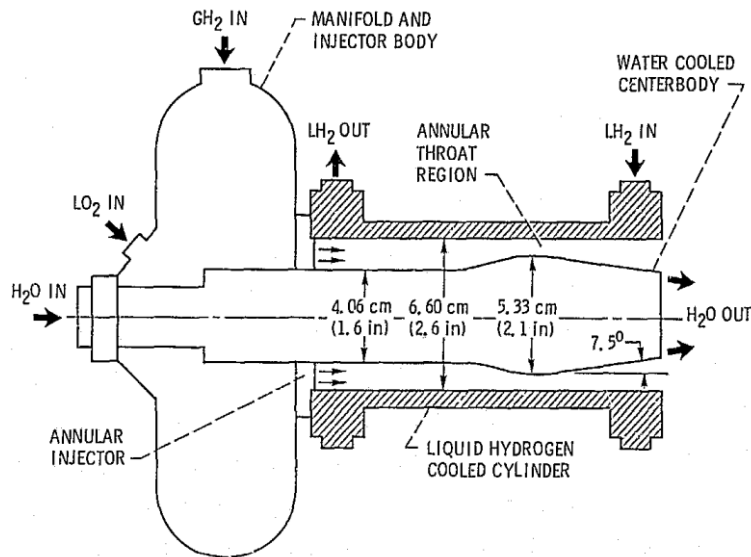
Cylindrical Thrust Chamber Assembly^[22]
